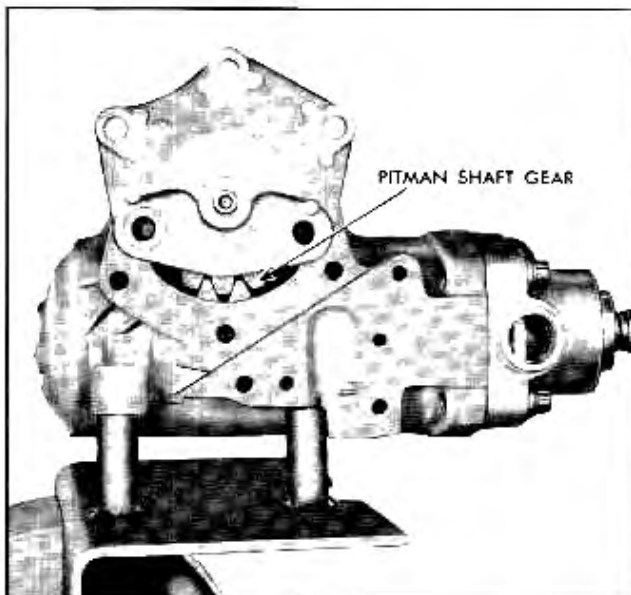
Pitman Shaft Gear Alignment for Removal
